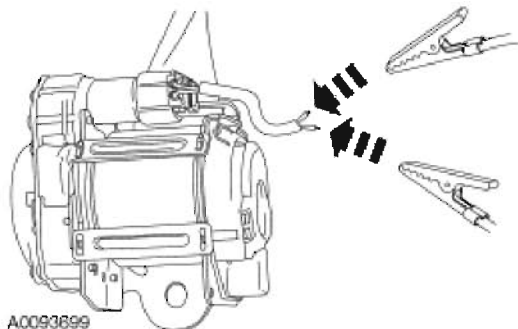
Attaching Jumper Wires To Safety Belt Retractor Pretensioner
